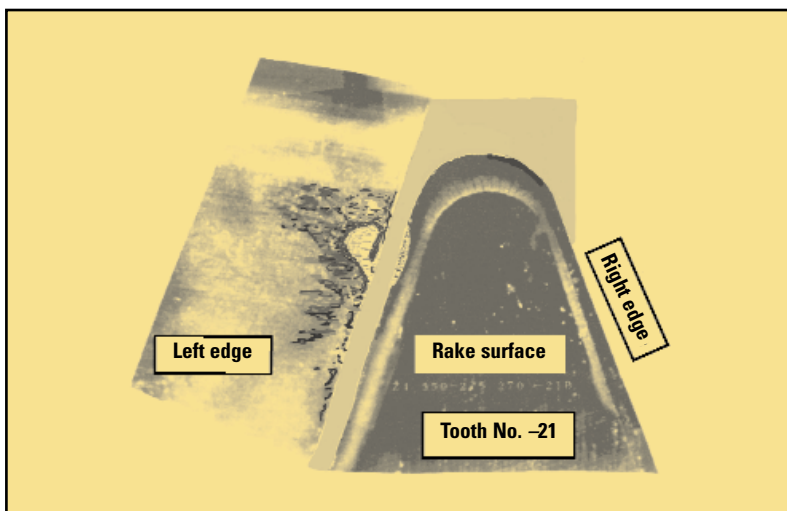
Chipping of carbide hob cutting edge under dry cutting.
